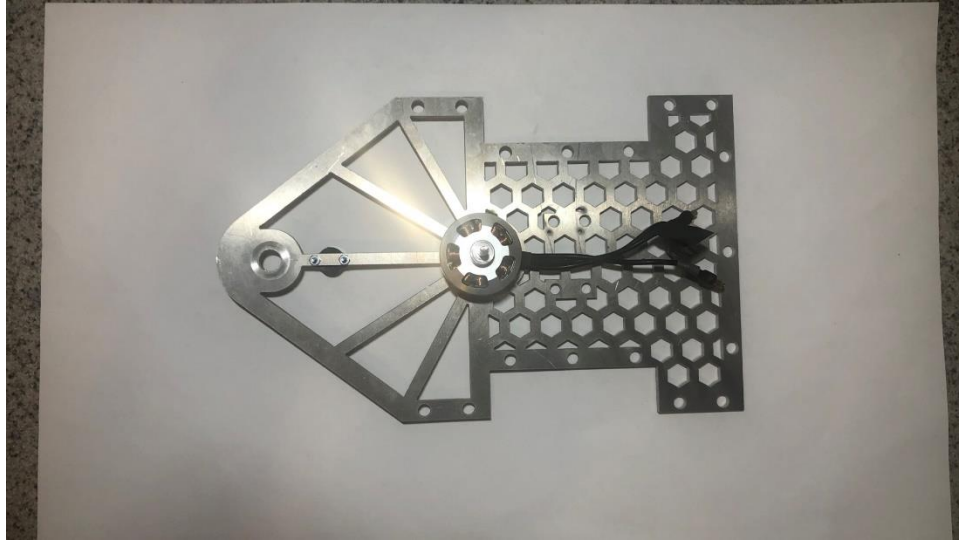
Additions: Turnigy Aerodrive SK3 3530-1150kv Brushless Outrunner Motor
